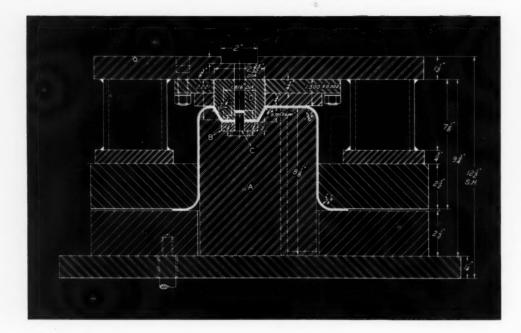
Construction of the Die Employed in Drawing the Generator Housing Illustrated in Fig. 18. Pin C Pierces a Hole through the Material to Avoid the Development of Fractures in Forming the Boss
